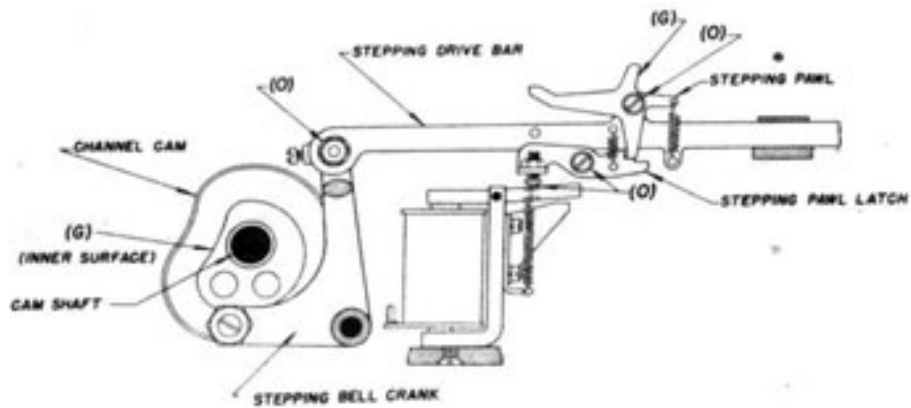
C - CODE WHEEL STEPPING MECHANISM
